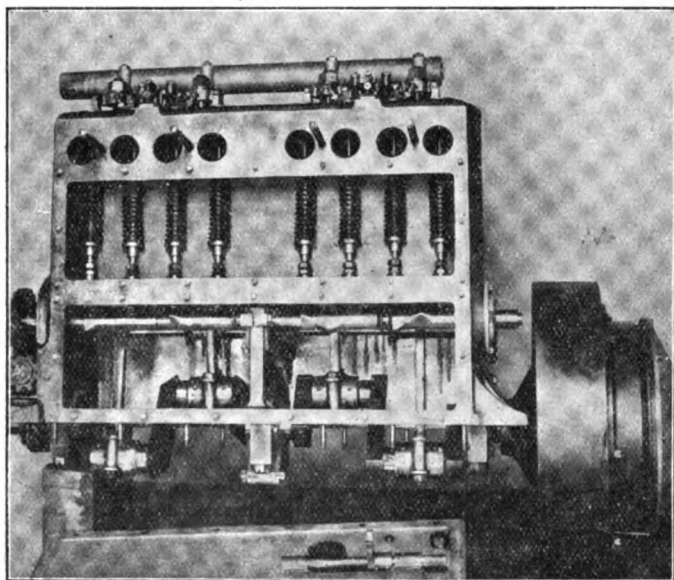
The Deasy Engine with Inspection Doors and bottom half of Base Chamber removed.
